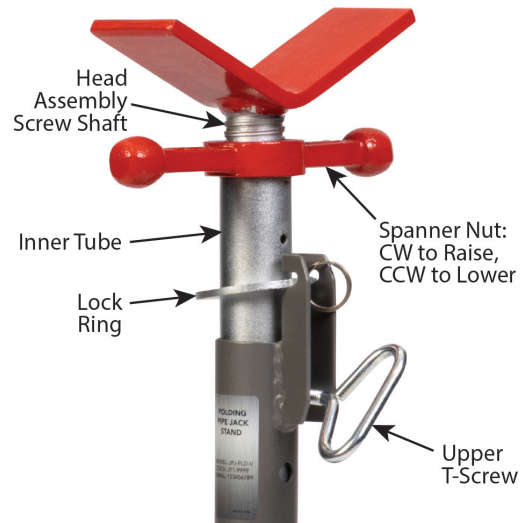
Adjusting Inner Tube Height (Model JPJ-FLD-V Shown)
